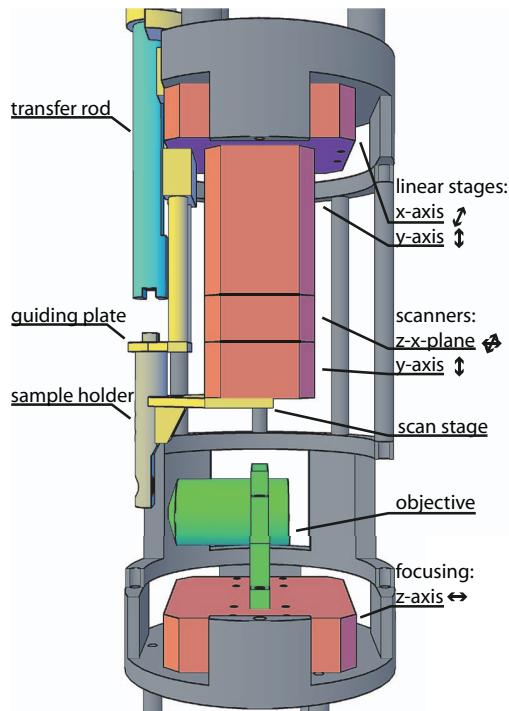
Mechanical design of the lower part of the probehead used for low temperature microscopy. The dimension of the probehead must fulfill the constraints of inner sample chamber of the cryostat (diameter 2.44 in. (~ 62 mm)). The whole arrangement is fitted together by a cage (grey) made of stainless steel. In the cage different types of piezo modules (red) are mounted to move the sample during sample transfer and sample scanning. One stage is mounted on the bottom of the cage carrying the MO (green). The sample holder (light grey) is mounted magnetically to the scan stage (yellow). The sample holder can be inserted or removed by a transfer rod (light green). The attachment of the sample holder to the transfer rod is realized by magnets that are fitted in the end of the holder and the rod (for detail see text).
